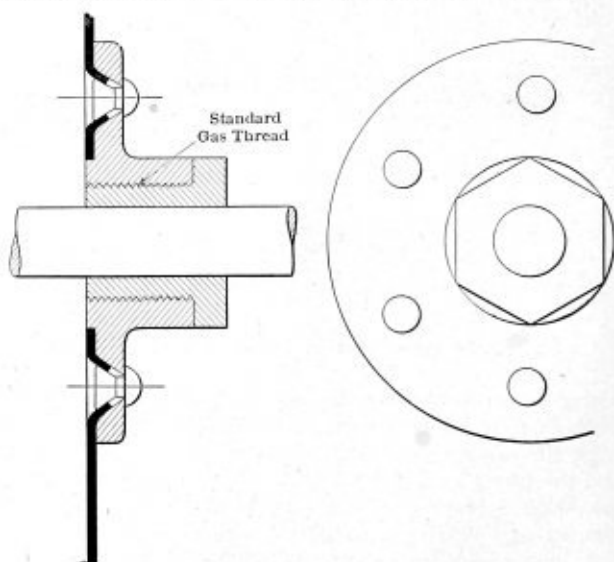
Flush Face Interior to Job Showing Special Riveting. Cast Iron Screwed Hexagon Bushing Forms Bearing
